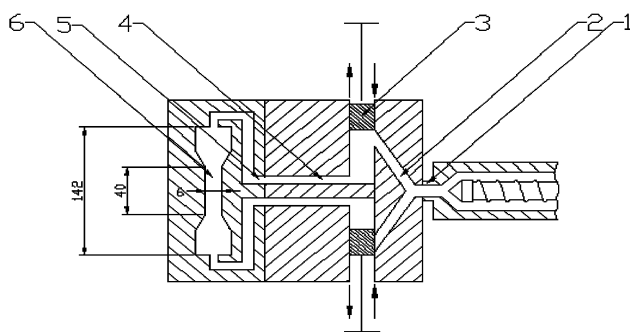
Schematic diagram of the device for dynamic packing injection molding. (1) Nozzle, (2) sprue, (3) piston, (4) runner, (5) connector, (6) specimen.
